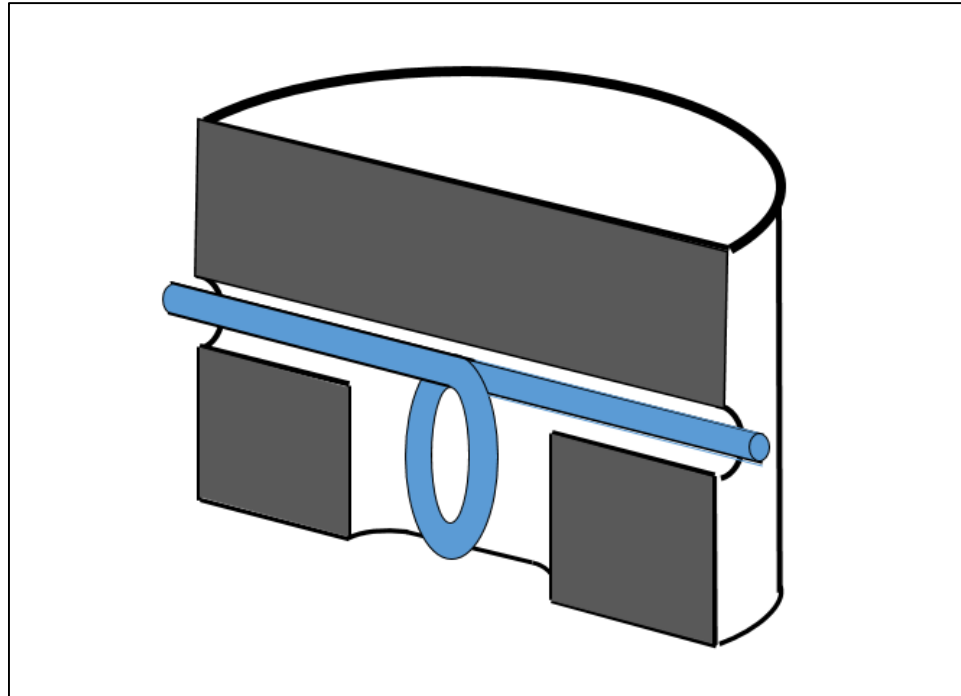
Cutaway of Scratch Head with Scratcher Shaded Blue
